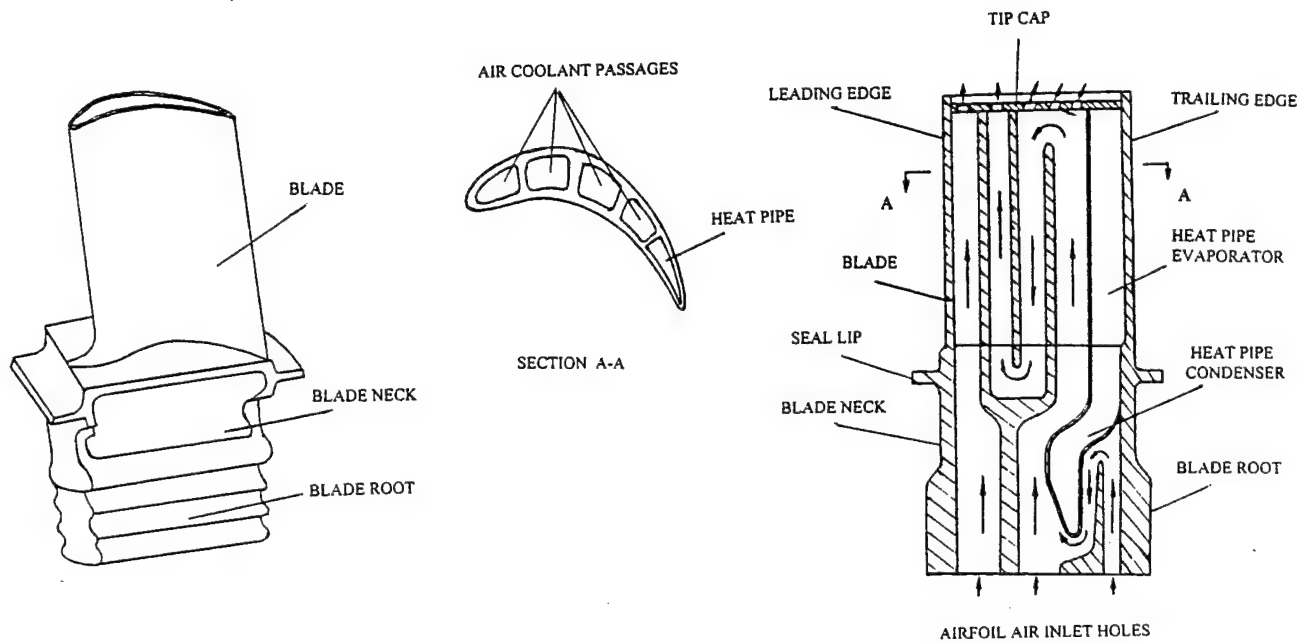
Schematic of air convection cooling combined with radially rotating heat pipe cooling for turboengine blades.
